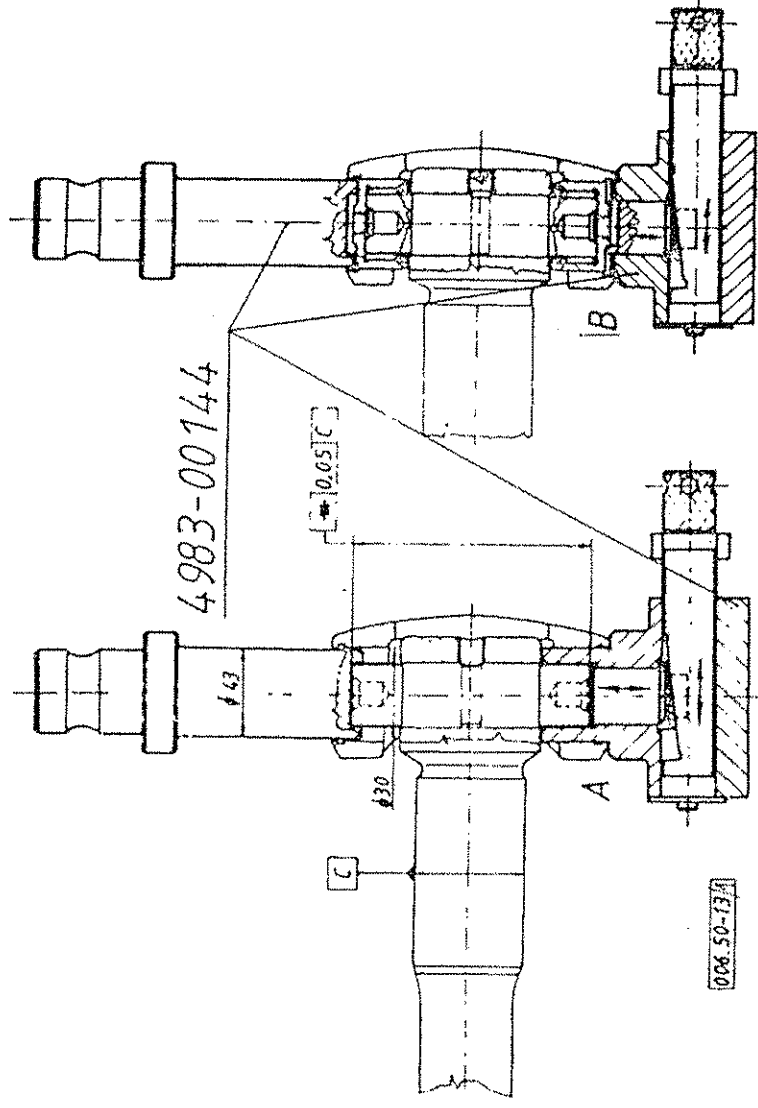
INSTALLING THE KNUCKLE PINS AND THE BEARING CAPS
